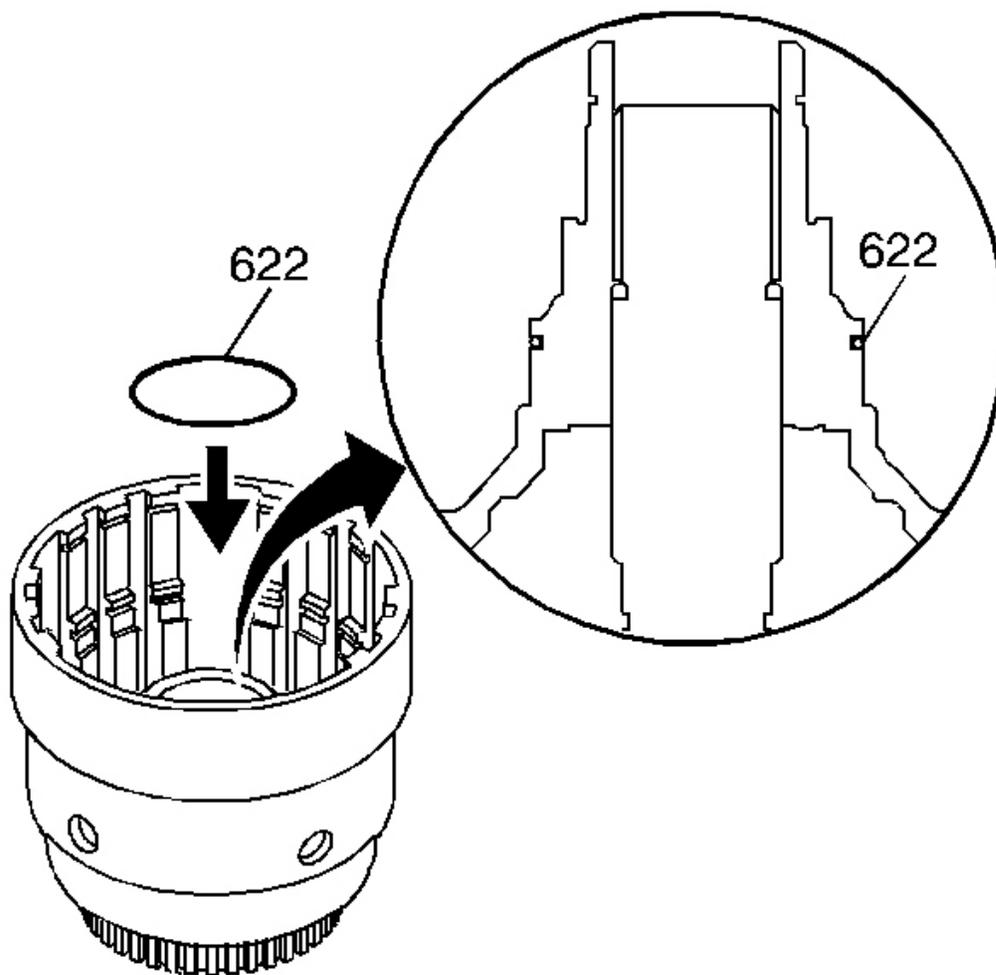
Input To Forward Clutch Housing O-Ring Seal
